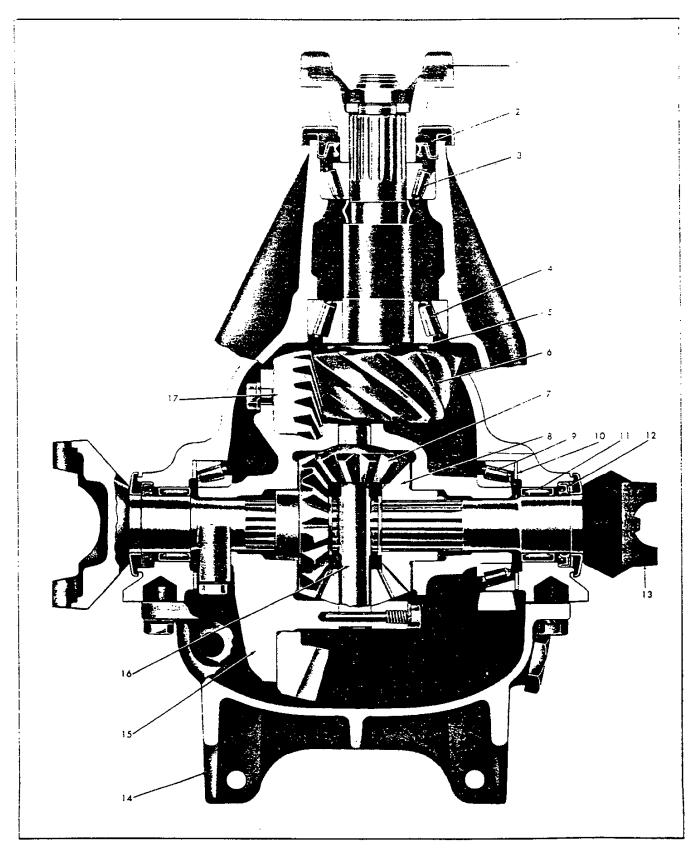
Corvette Axie Cross-Section (see legend following page)
